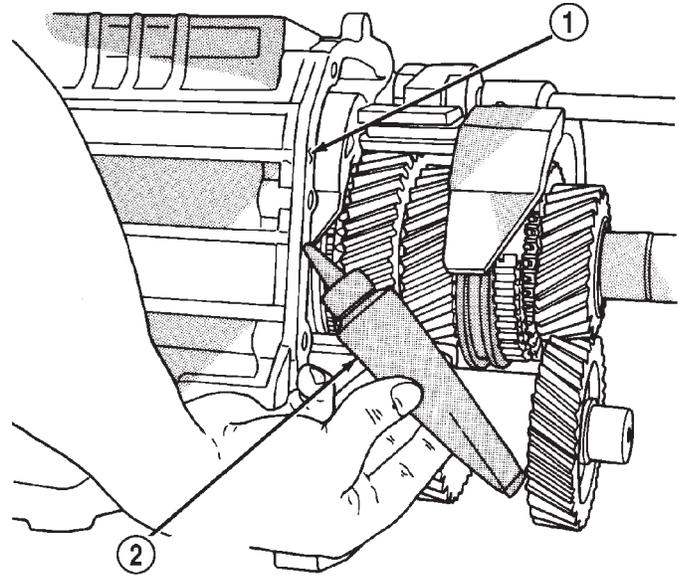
COUNTERSHAFT FRONT BEARING
